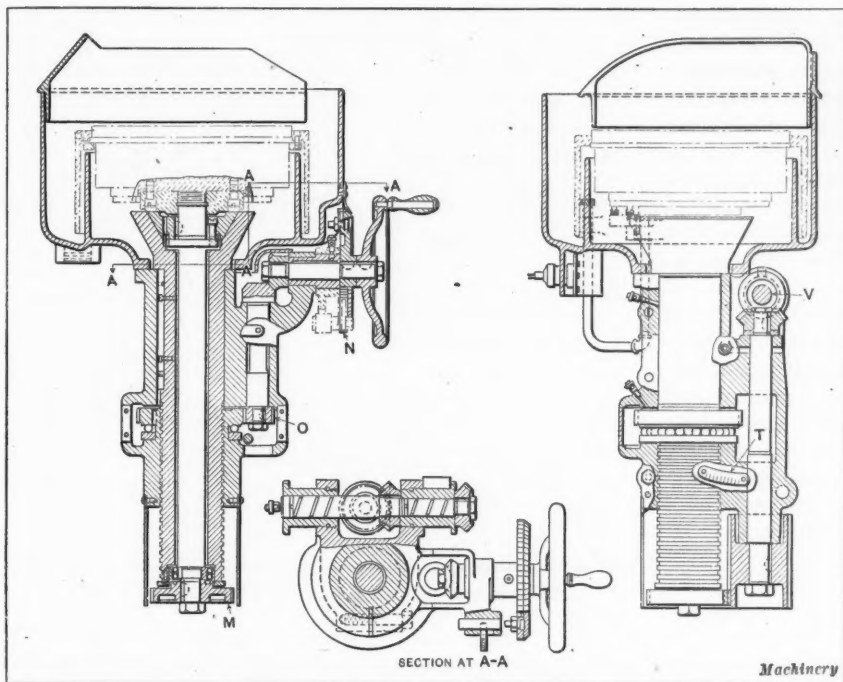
Sectional View of Work-spindle Knee, showing Feed Mechanism and Means for grinding Tapered Work
